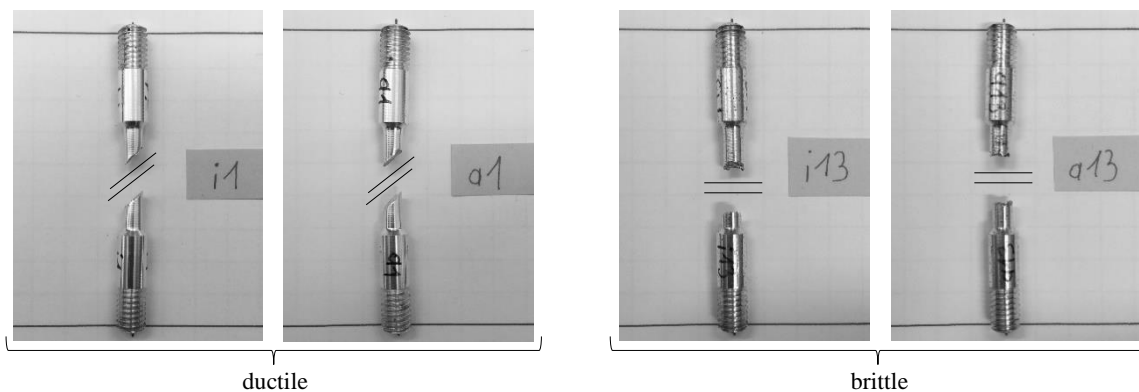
Fragments of DMLS-specimens after tensile testing. Left: Typical fractured surfaces of ductile material (shear fracture including necking) of specimens “i1” and “a1.” Right: Typical fractured surfaces of brittle material (flat fracture without necking) of specimens “i13” and “a13.”
